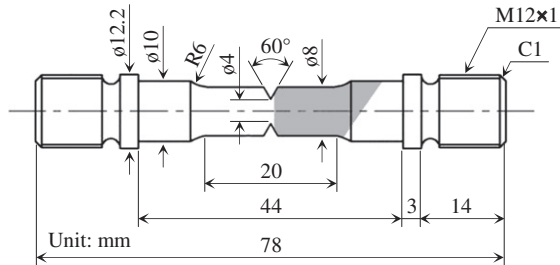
Dimensions of the notched tensile specimen for the SCC test. Note that the shaded area is the weld metal.
